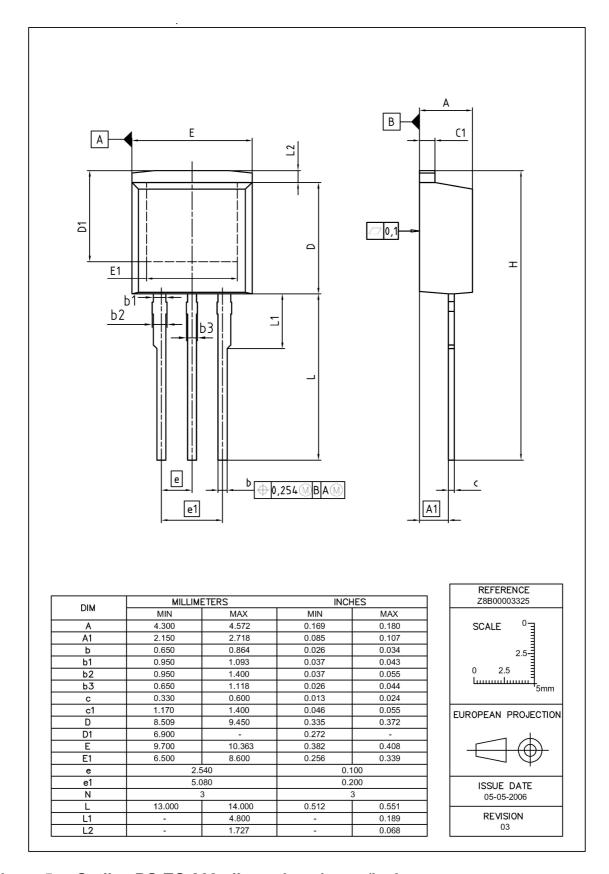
Outline PG-TO 262, dimensions in mm/inches
